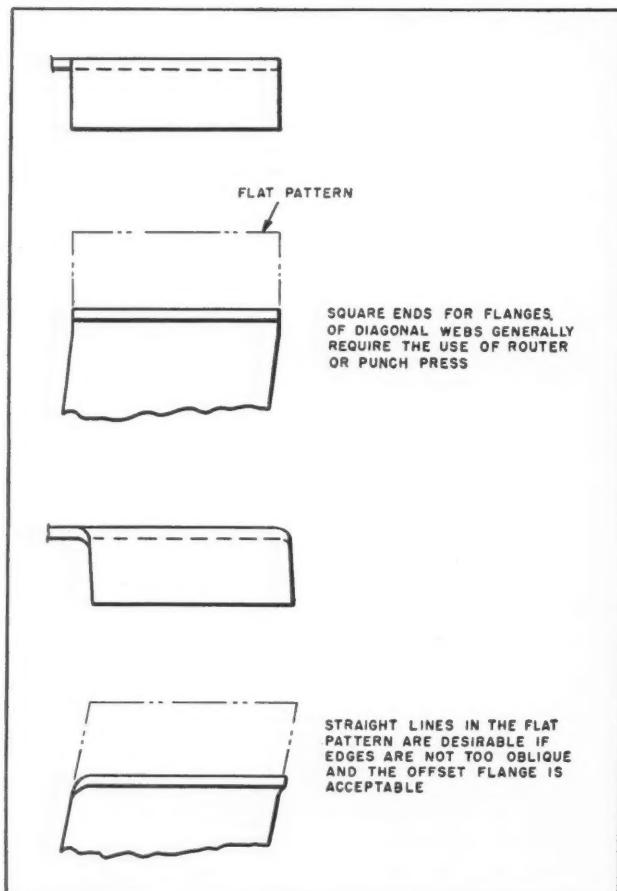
Fabricated plastic parts should be designed with straight edges, where possible, to permit straight shearing cuts.
